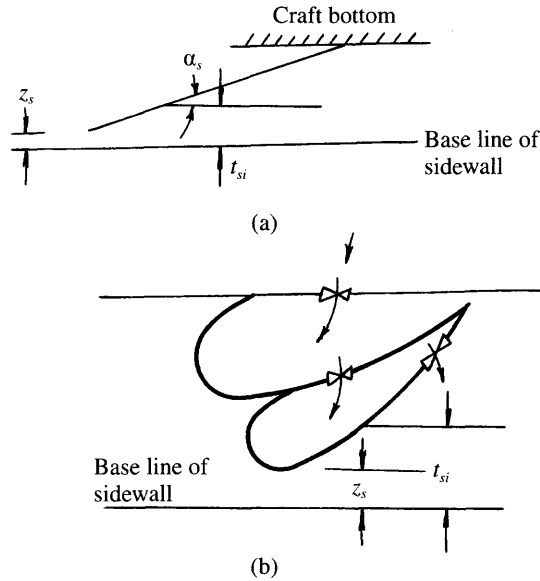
Geometry of stern seals: (a) planing stern seal; (b) twin bag skirt.
